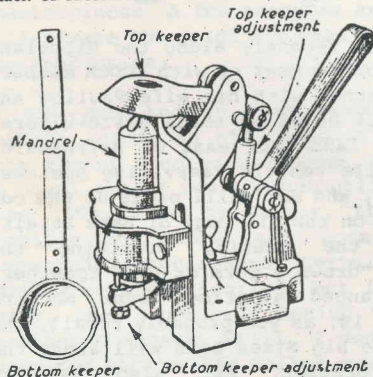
An Ammco universal jig which enables re-metalling to be carried out in rapid sequence on bearing shells of varying sizes.
